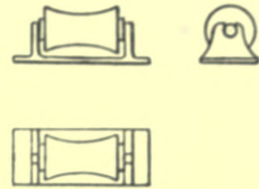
Front and End Elevations and Plan of Roller Stool for Pipes.
